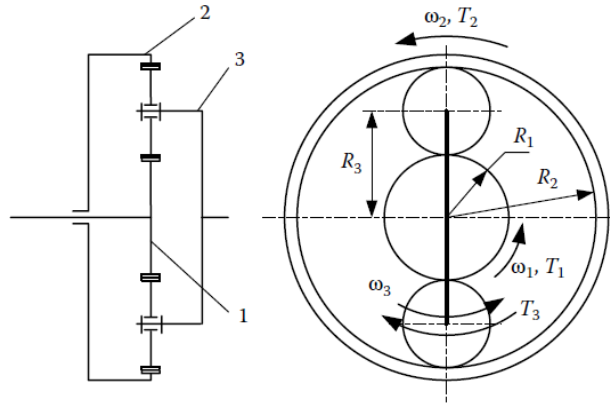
Planetary gear unit used as a speed-coupling device [1].
